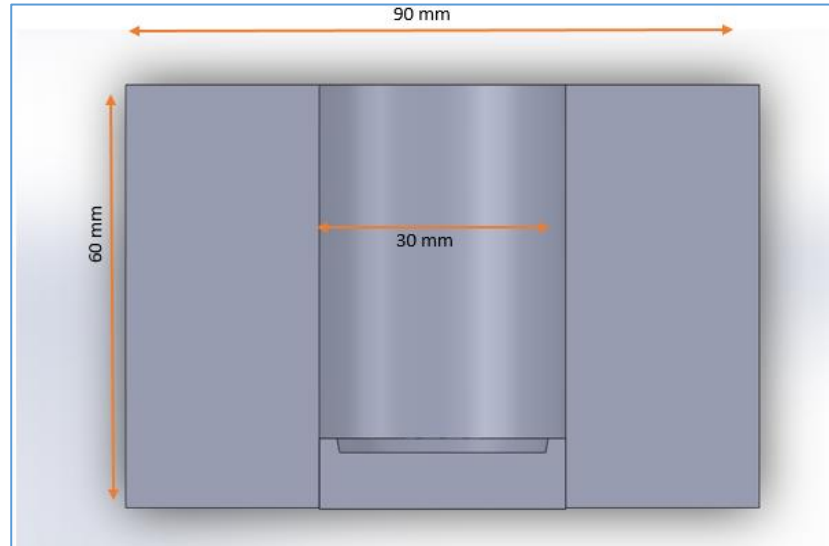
Cross-section of the permanent mold using during squeeze casting experiments.
